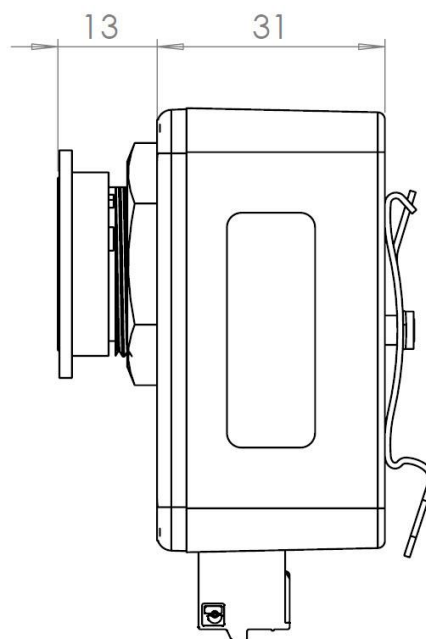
Remote Pendant Patch Board Mk2 DIN Rail Mount
